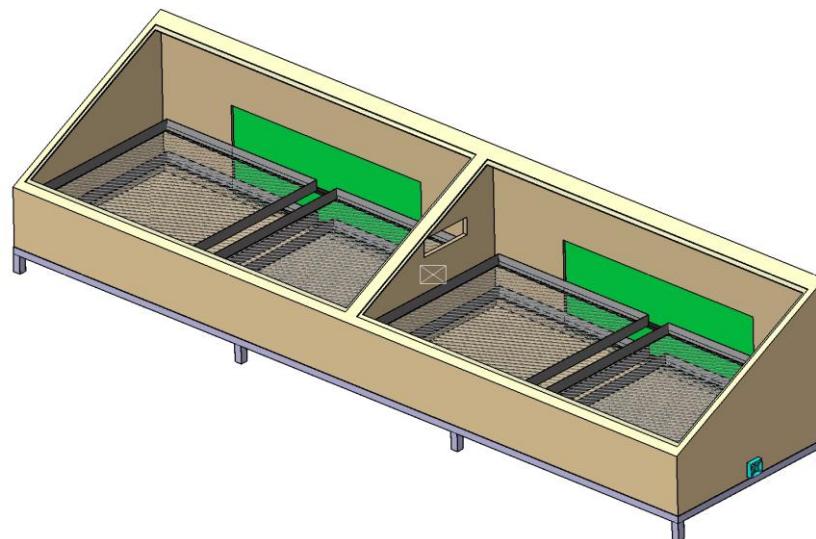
Pictorial View of Solar Tunnel Greenhouse Dryer
